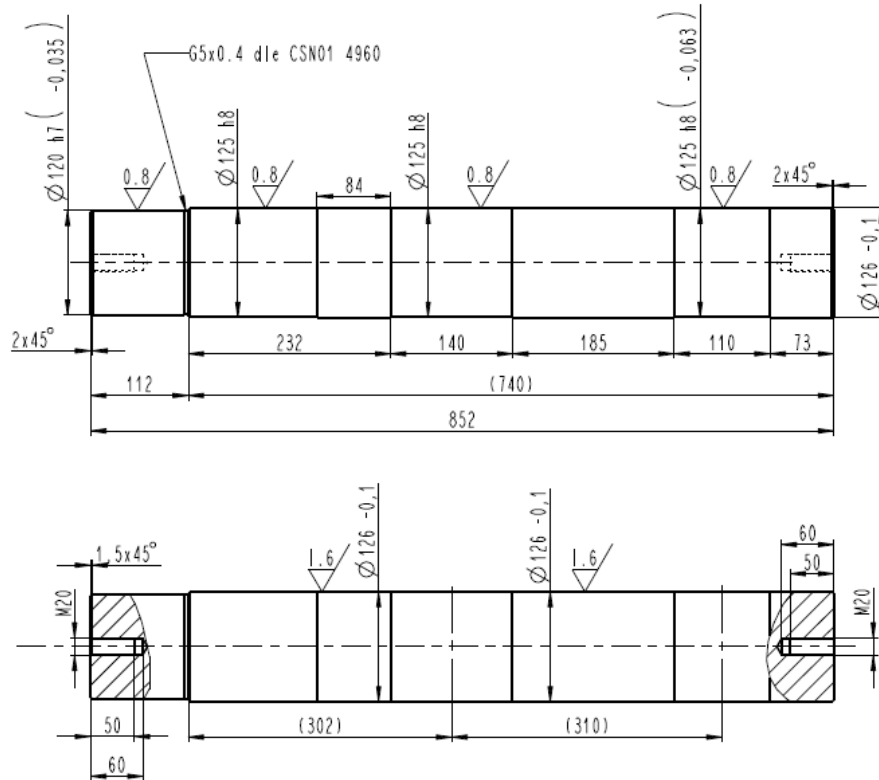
Extract from the production drawings for the sprocket shaft
